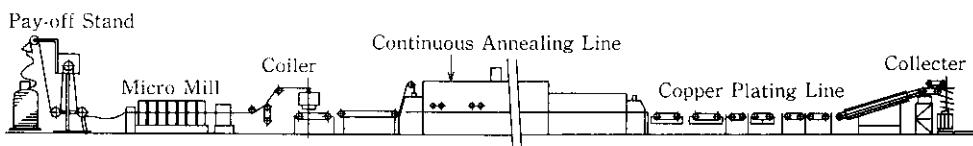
Schematic drawing of continuous manufacturing line of welding wire
